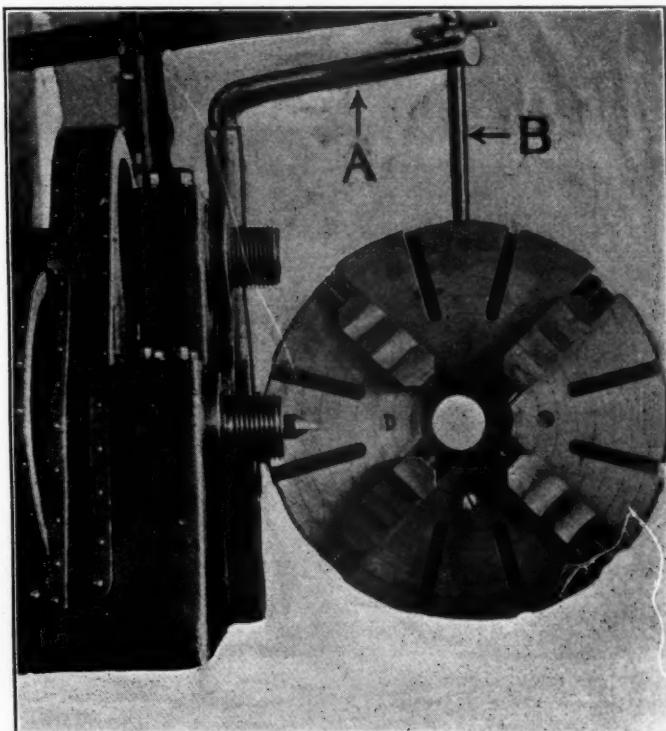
Swinging Arm Facilitates Removal of Chuck from Lathe Spindle
